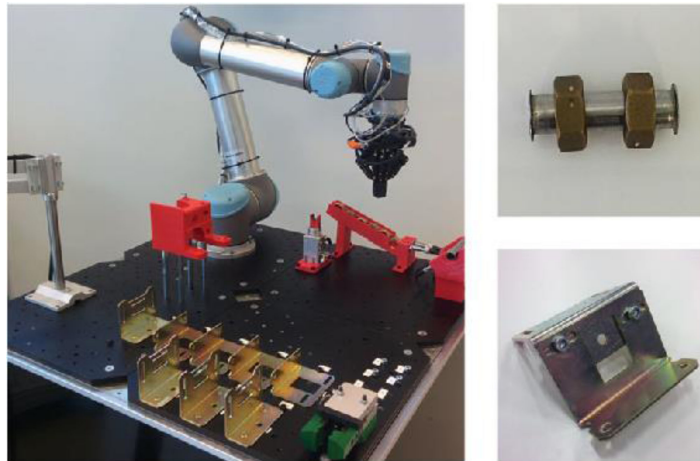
Experimental setup: industrial robot (left) and the two product parts being automatically assembled and disassembled (right).
